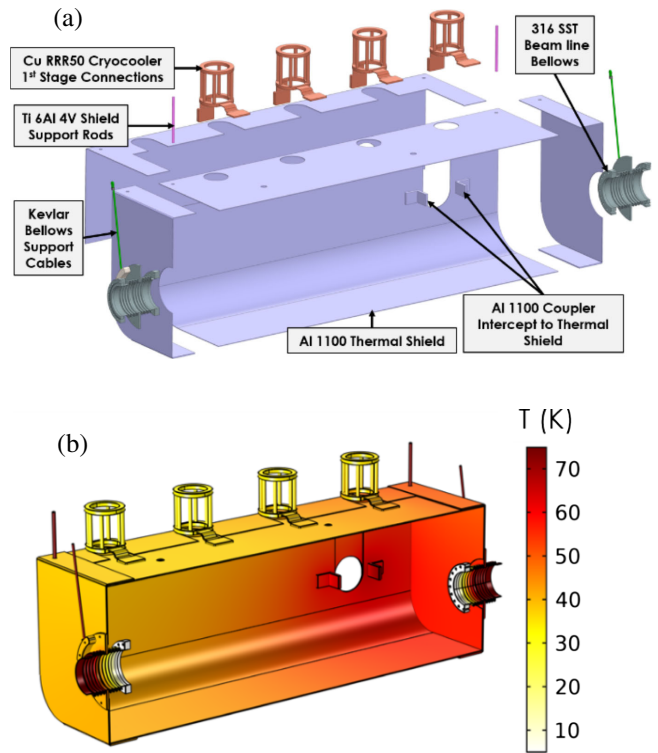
(a) Thermal shield exploded view showing how the shield panels and components are assembled. (b) Thermal shield temperature distribution during steady-state operation of the accelerator.
